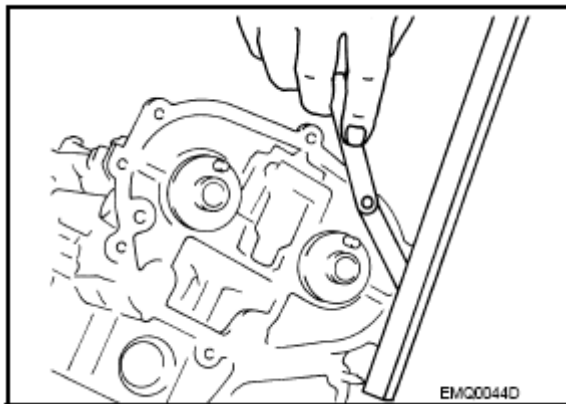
Measuring Difference Between Front End Faces Of Camshaft Bracket And Cylinder Head Using Feeler Gauge
